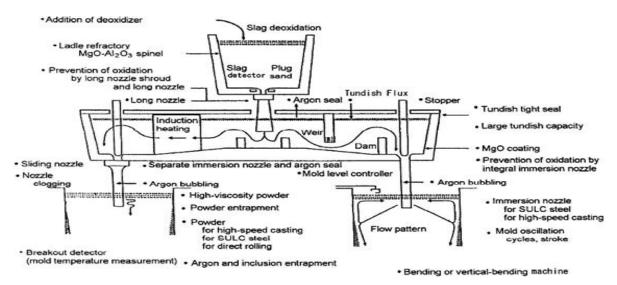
Continuous casting system (ladle, tundish and moulds) with all devices and precautions for casting clean steel (SULC = Super Ultra Low Carbon steel) [10].
